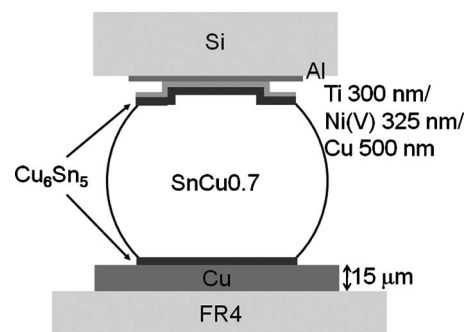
Cross-sectional schematic drawing of the solder joint.
